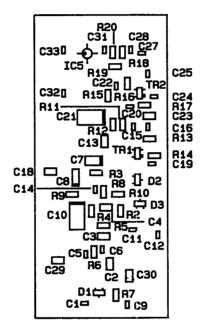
Oscillator Module - 3rd Local Oscillator - Side B layout
